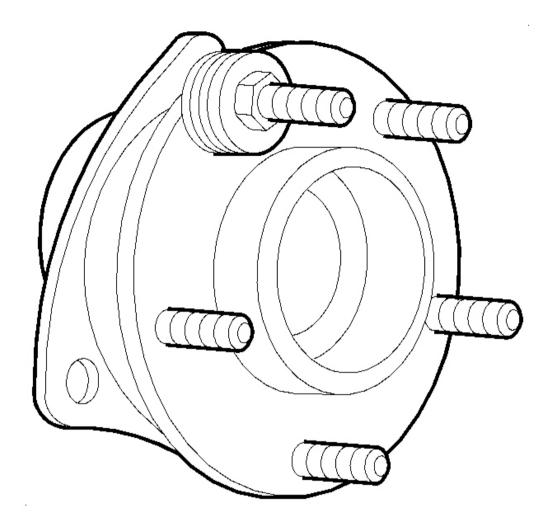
Hex Head Nut & Wheel Stud Courtesy of GENERAL MOTORS CORP.
